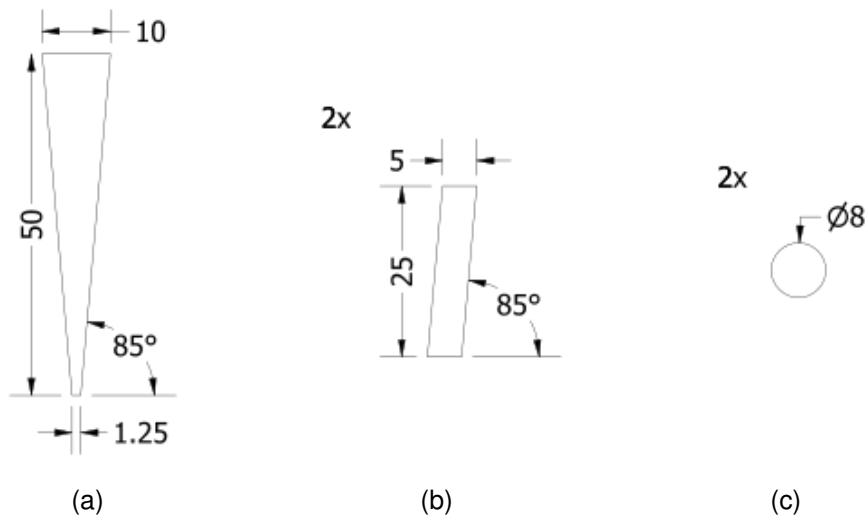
Frontal view of the parts used for the WST setup. (a) One wedge, (b) two blocks, and (c) two cylinders. Their out-of-plane length is 75 mm. Dimensions are in mm.
